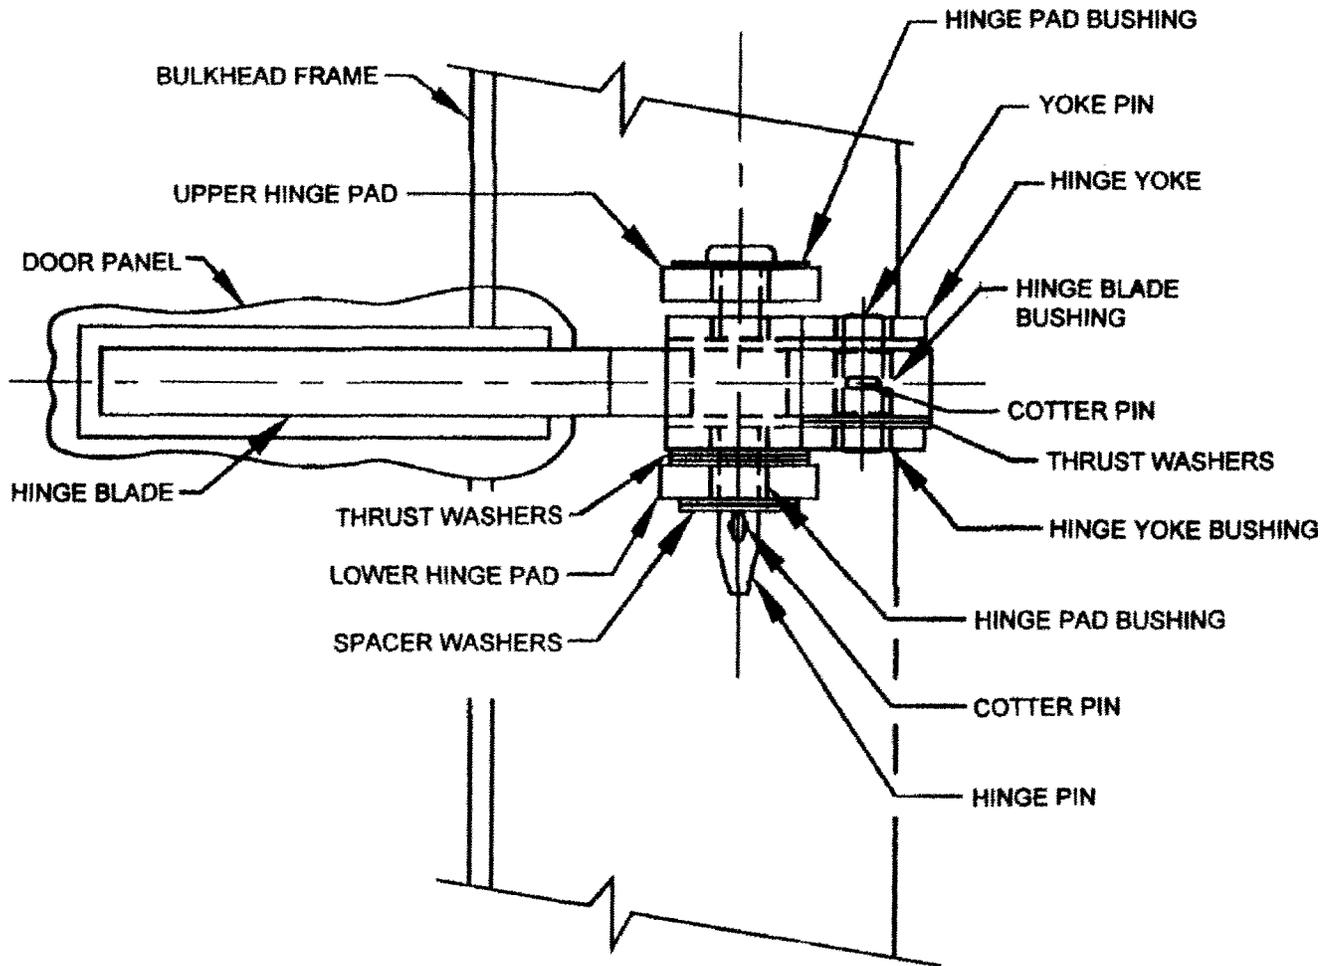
Quick-Acting Watertight/Airtight Door Hinge Assembly Modified by MACHALT 167-31011 (ECP-538)
